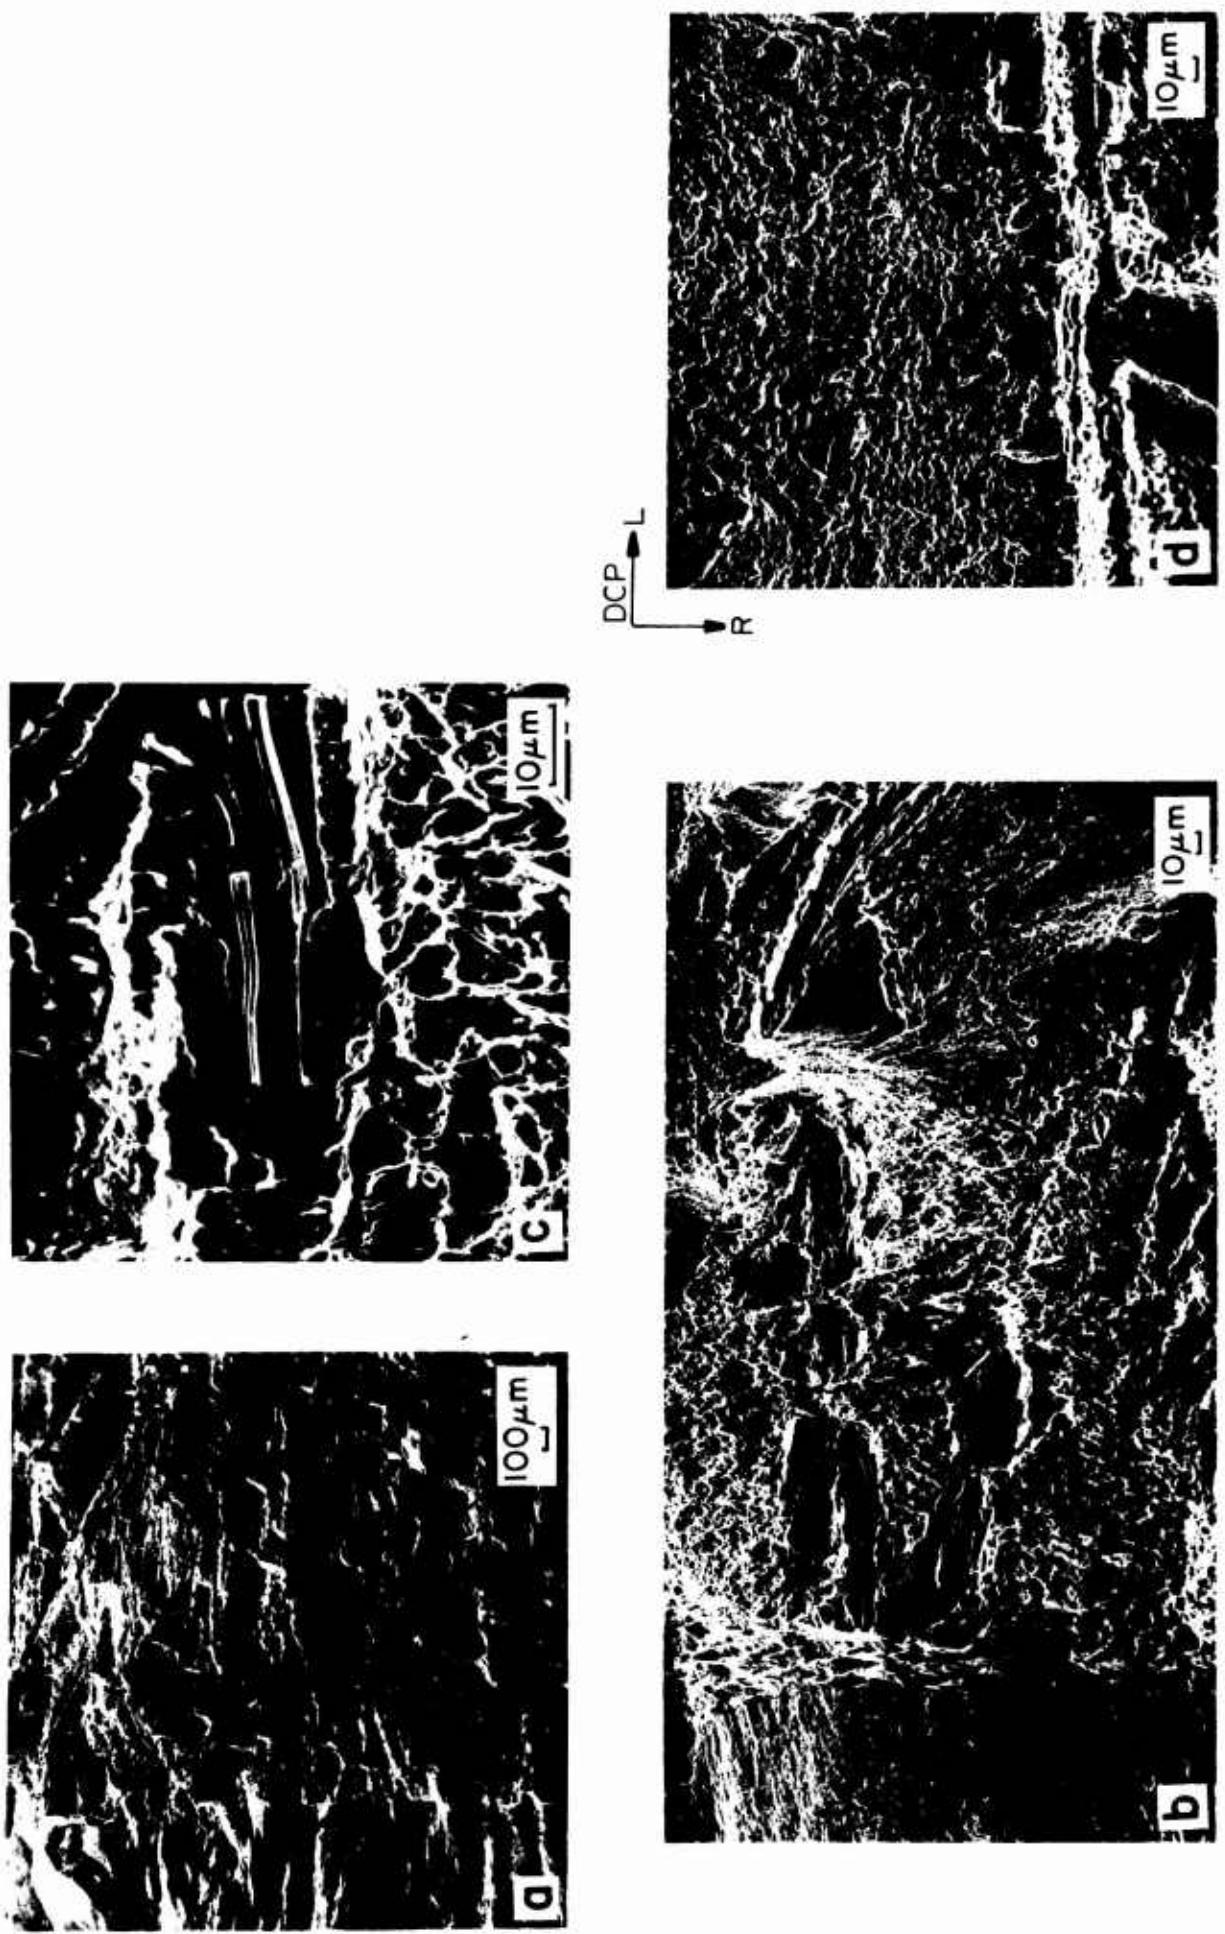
Alloy 253, sample 3SLC2. SEM of fracture surface (a) X250 - precrack/fast fracture transition, (c) X1000 - fast fracture close to transition, (b) X300 - fast fracture.
